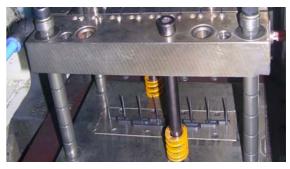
Photograph of injection molding products of holders using 8-cavity die
